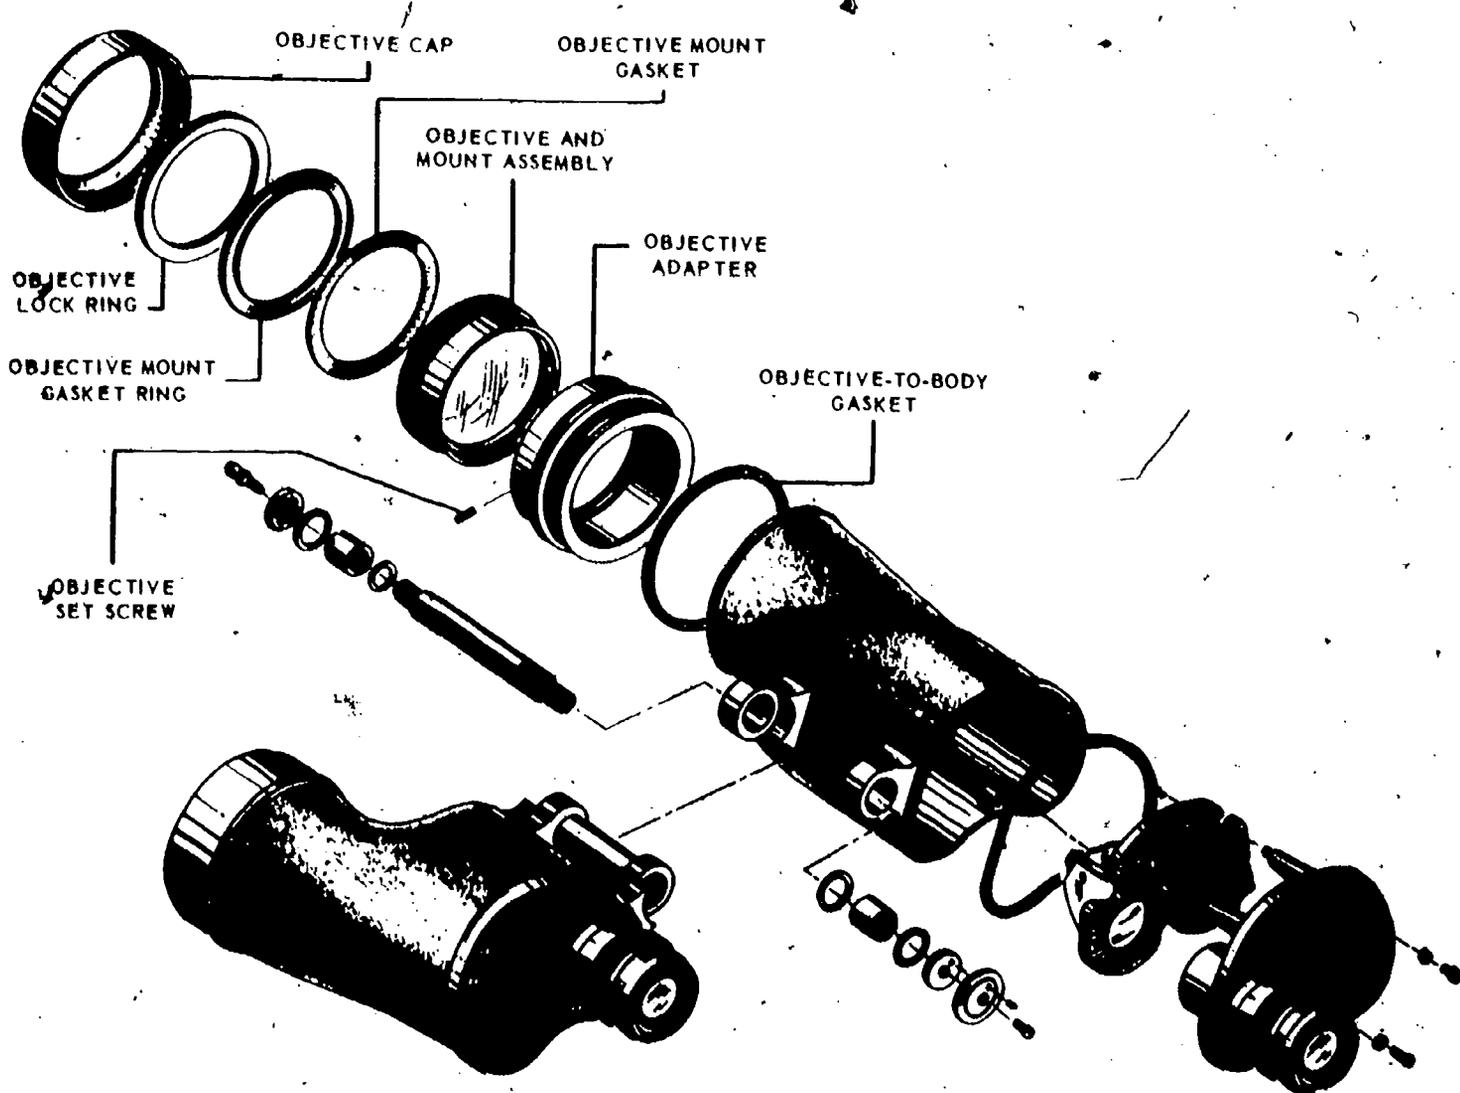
Mk 45, 7 X 50 binocular assembly—exploded view.
